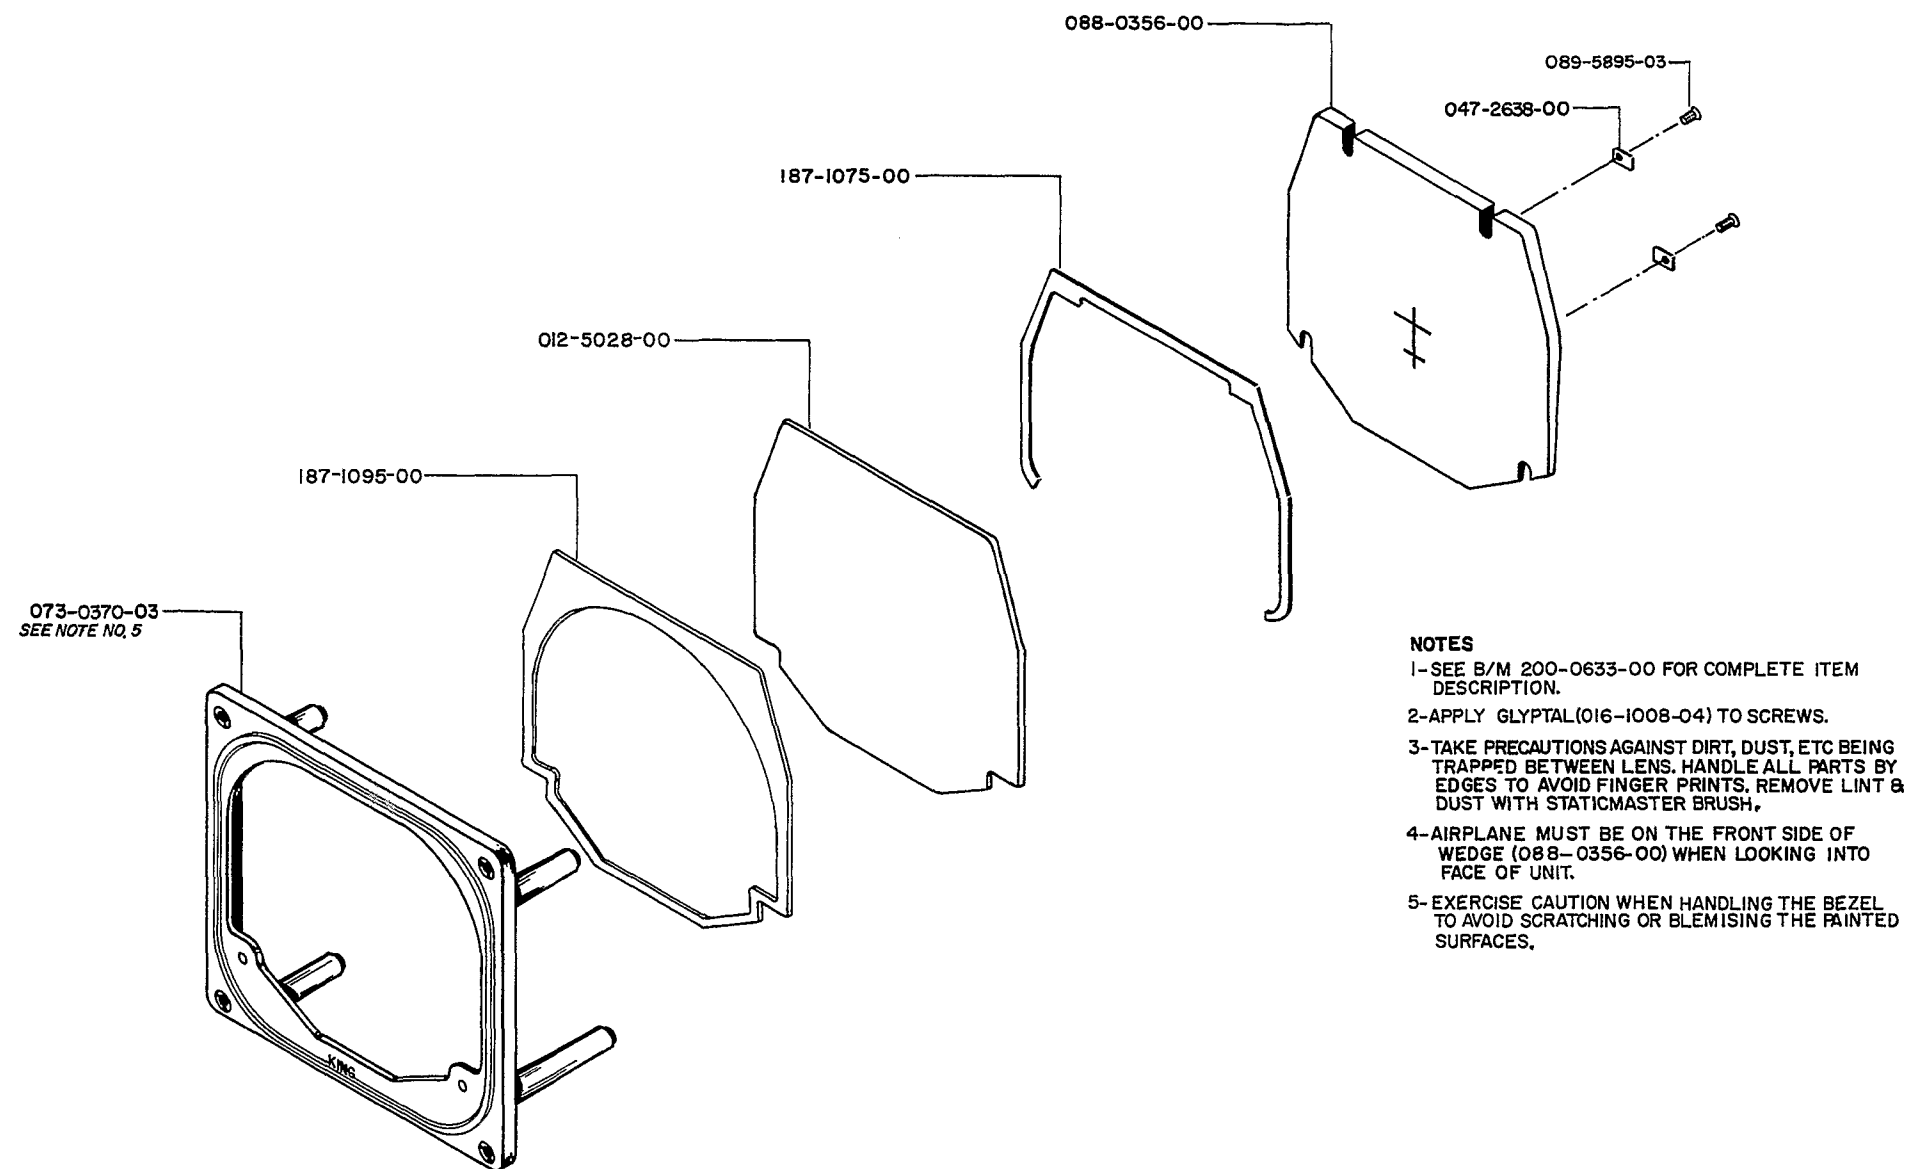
KI 525A BEZEL ASSEMBLY
